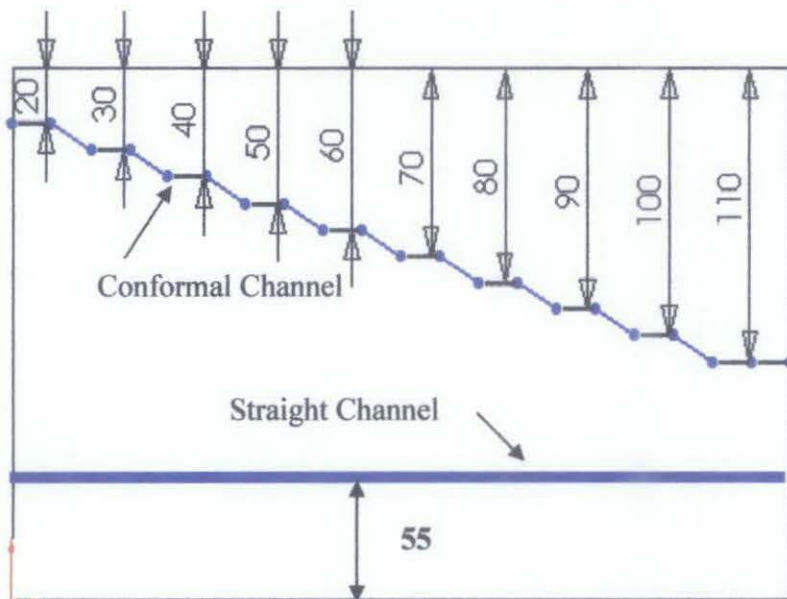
Front view of assembled laminates with conformal & conventional channel
